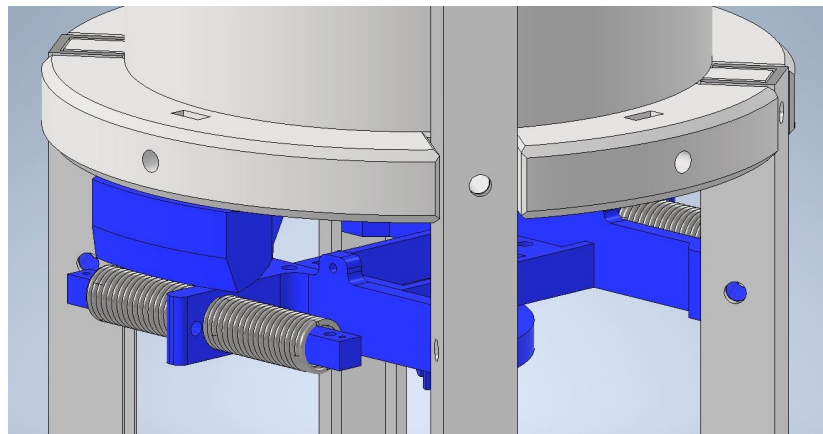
Locking mechanism for panels with separation springs and a parachute bulkhead at the top of the payload bay
